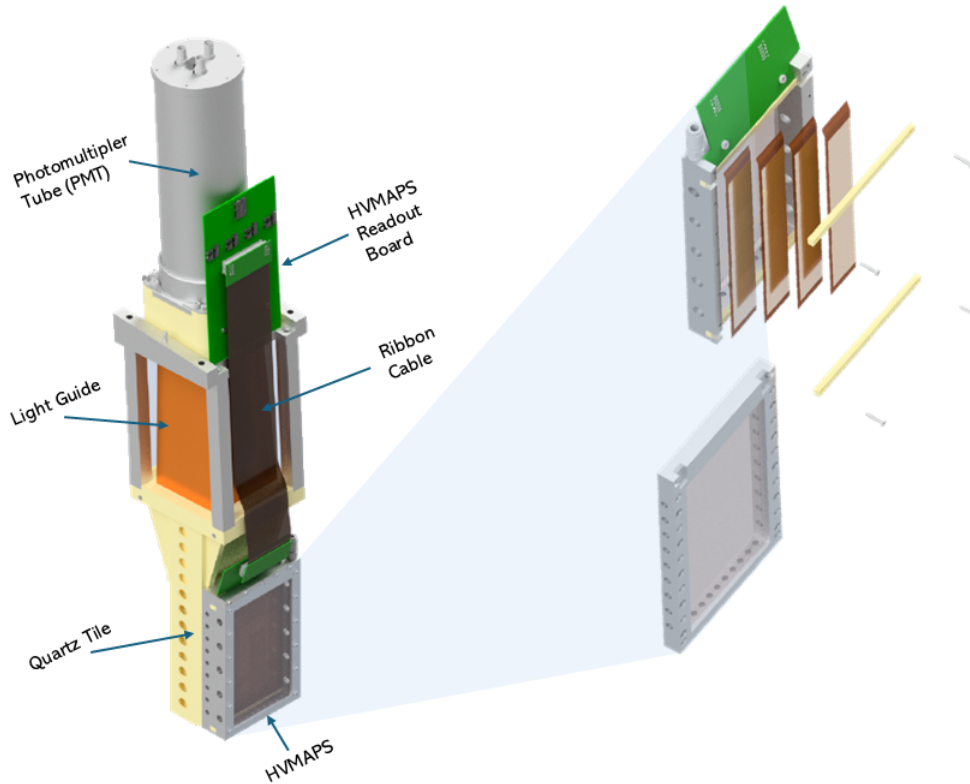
Conceptual design of the ring five assembly and its main features. To the right, an exploded view illustrates the components of the HVMAPS assembly. Figure adapted from [32].
